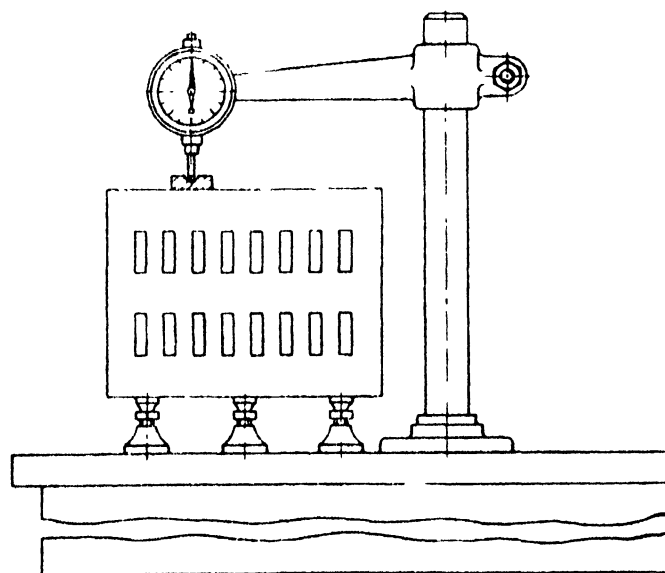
COMPARATIVE METHOD WITH SURFACE GAUGE
